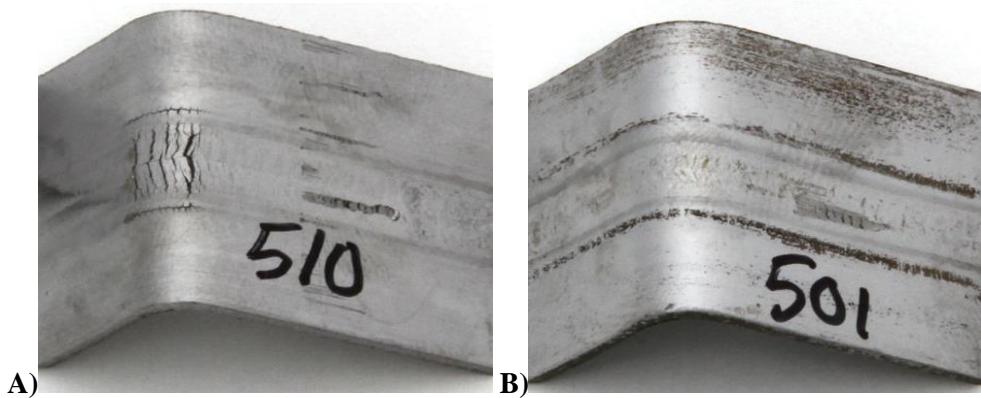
Strauss test samples: Failed as-welded sample (A) and passed PWHT sample (B). Material Producer C 1.4016, thickness 1.0 mm, heat input 0.07 kJ/mm.
